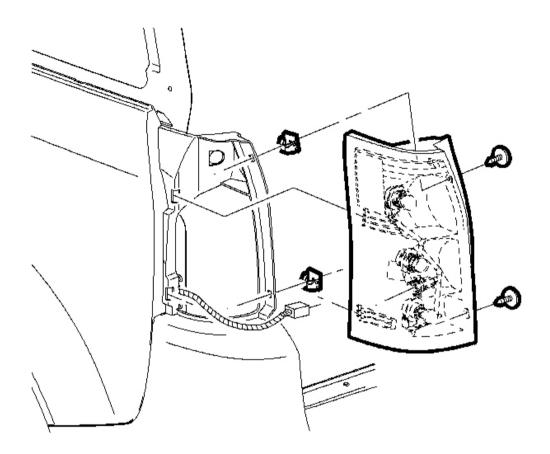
View Of Tail Lamp Assembly & or Backup, Sidemarker, Stop, Turn Signal Bulb Courtesy of GENERAL MOTORS CORP.
